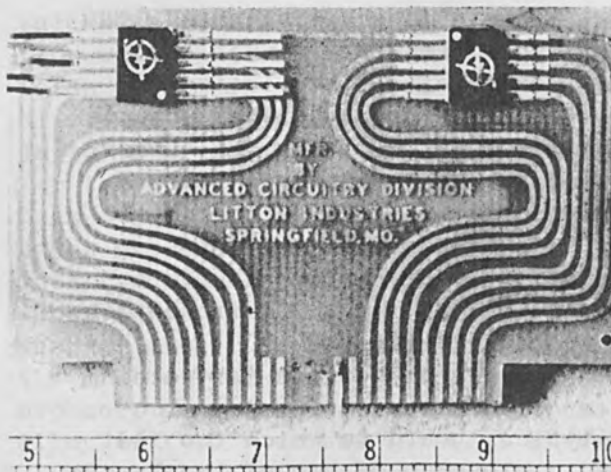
Two integrated circuits welded to a printed-circuit board.
